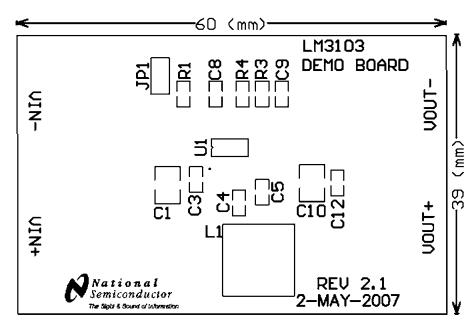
LM3103 Demonstration Board PCB Top Overlay
